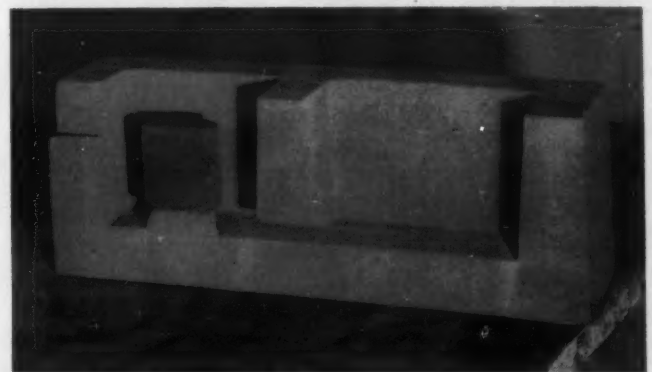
Baked core sand mold cut thru lengthwise showing 2 in. dia. x 2 in. long test specimen pasted in place.
